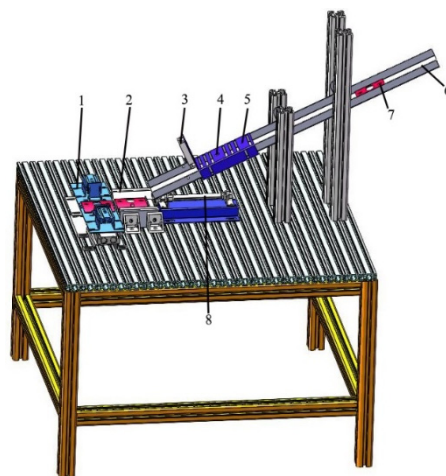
Structure diagram of the girdle feeding mechanism. 1. Welding area; 2. girdle blanking waiting for area; 3. cylinder; 4. inductive proximity switch; 5. electromagnet; 6. storage chute; 7. girdle; 8. mini cylinder.
